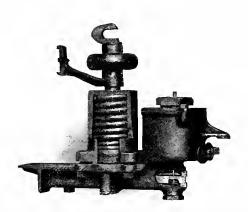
Unit Switch Magnet and Cylinders Cut to Show Working Parts of the Air Cylinder of Unit Switches.
